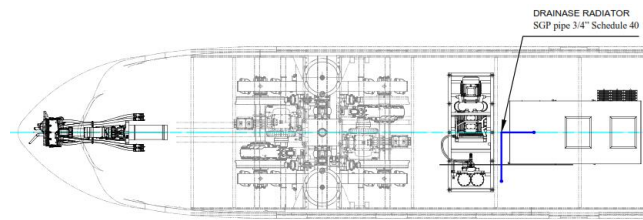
Fuel Piping Diagram on Motor Engine Combustion Engine (Top View)
